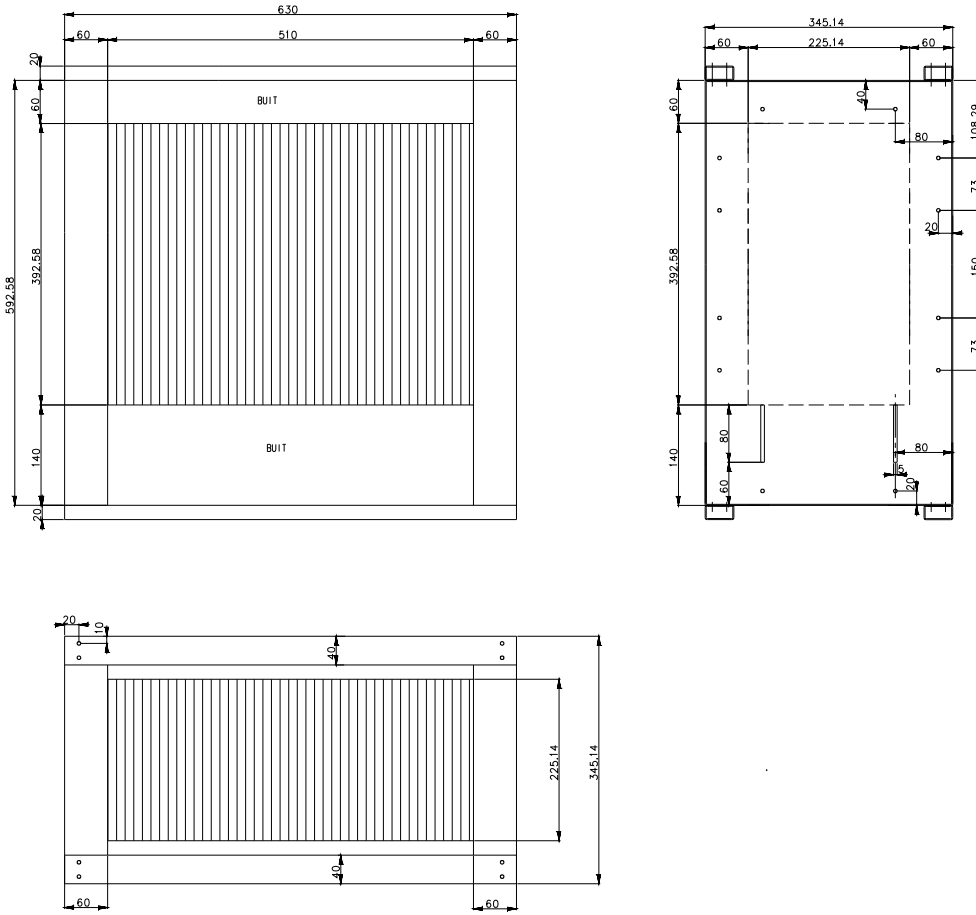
Construction and dimensions of the galvanized steel prototype
